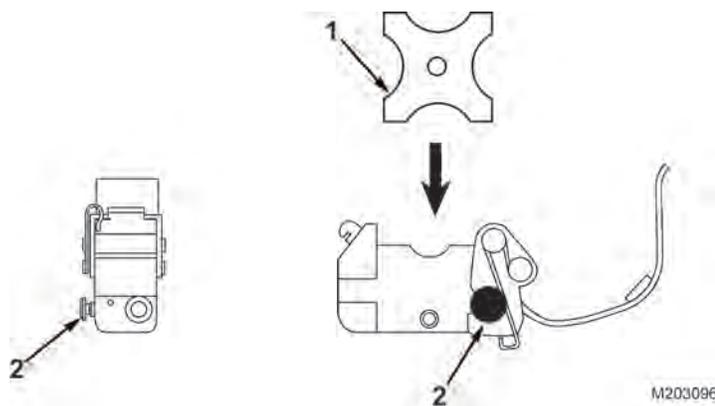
Five-Position Spacer Plate — No. 5 Position — M4 Carbine.
